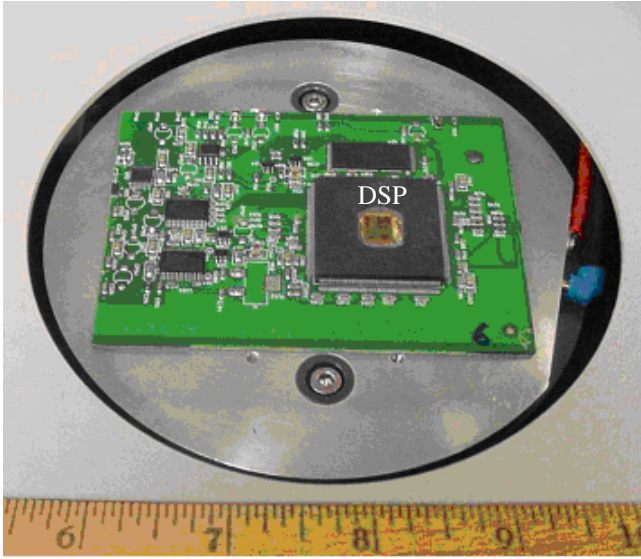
FICBM test method setup for the cut-down customer production board with the decapsulated DSP. The cuts were made along the top and left side of the PCB. Note that the DSP is located near the original corner of the PCB.
